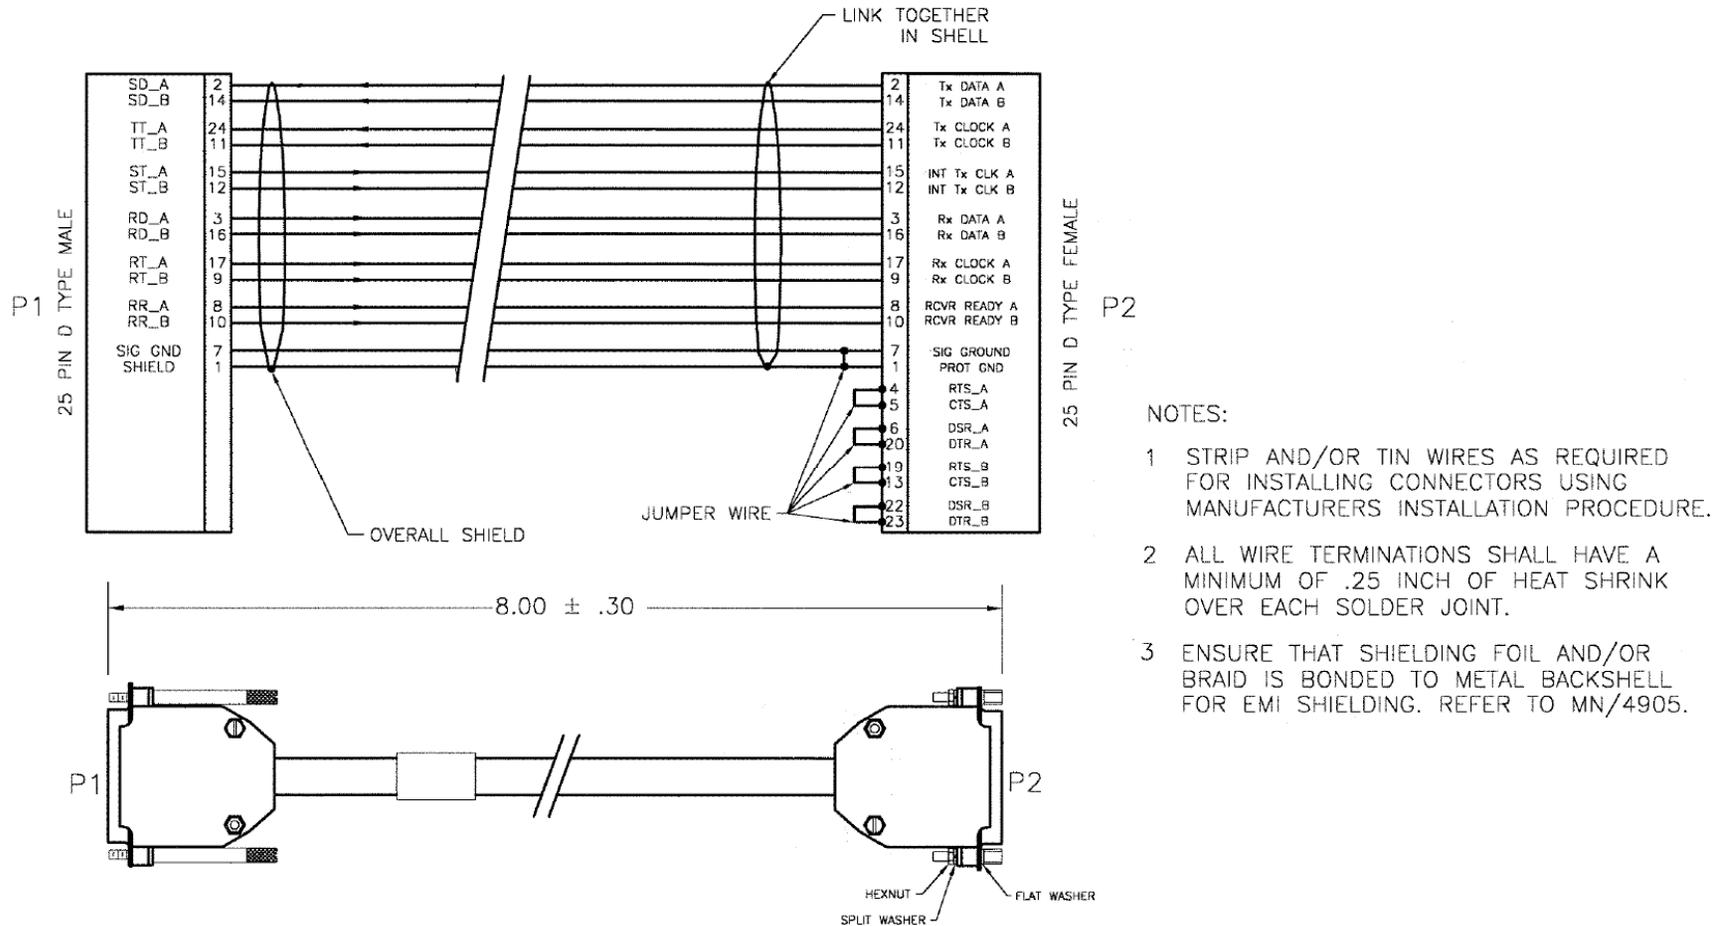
EIA-530 DCE Conversion Cable (CAWR9718-1)
